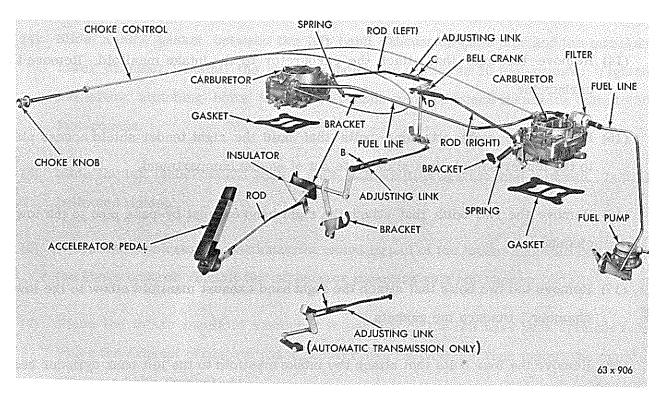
Accelerator Pedal Throttle Linkage (FirePower 390 Engine)
